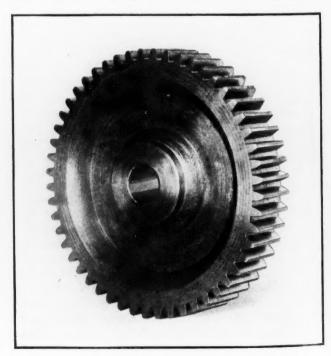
Completed Gear Made from Blank in Fig. 4, After Machining
